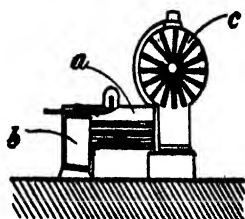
Rotary Tray Tea Drying Machine (vertical longitudinal section).
